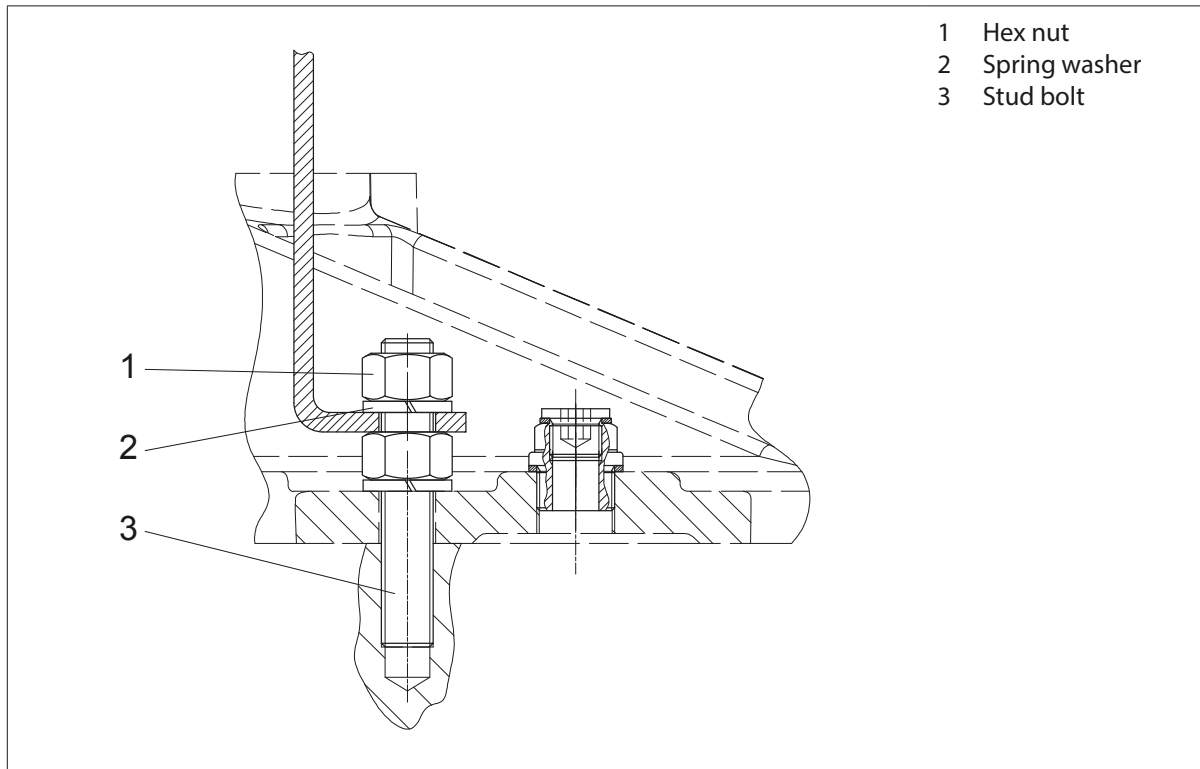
Accessory set, Part 2: Mounting set with nut and spring washer
